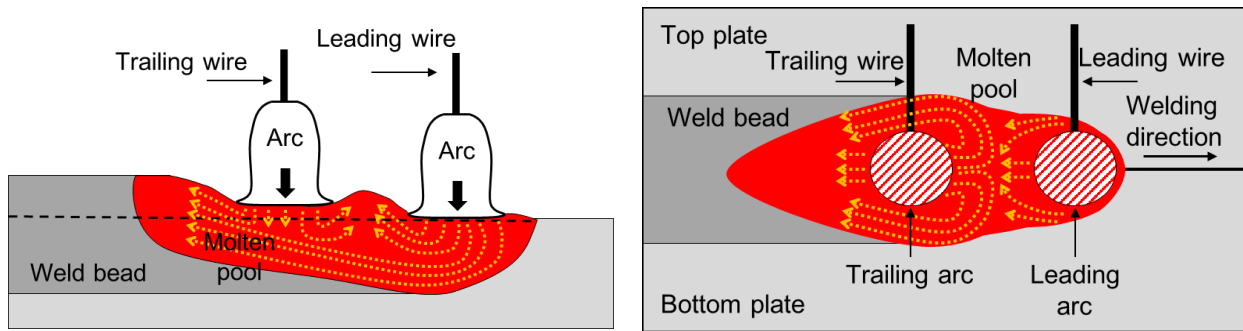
Schematic diagram of the molten pool convection in tandem gas metal arc welding.
